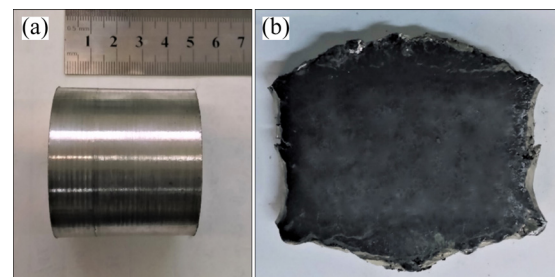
Photos of workpiece before (a) and after (b) hot-forging process
